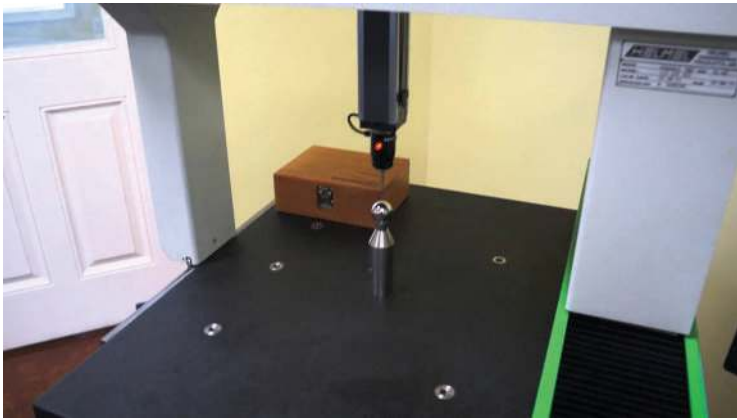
Helmel Phoenix coordinate measurement machine.
